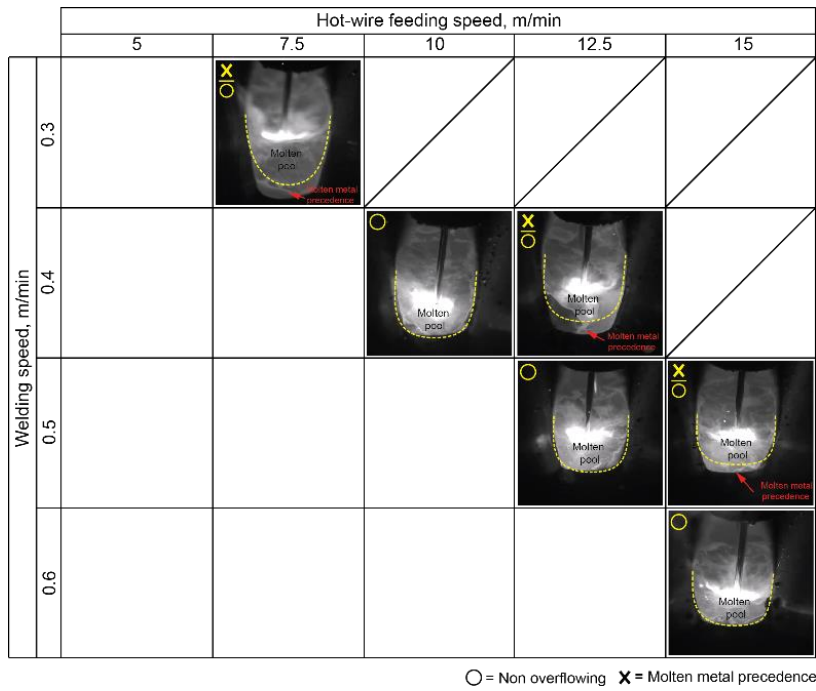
High-speed images of molten pool during welding.
